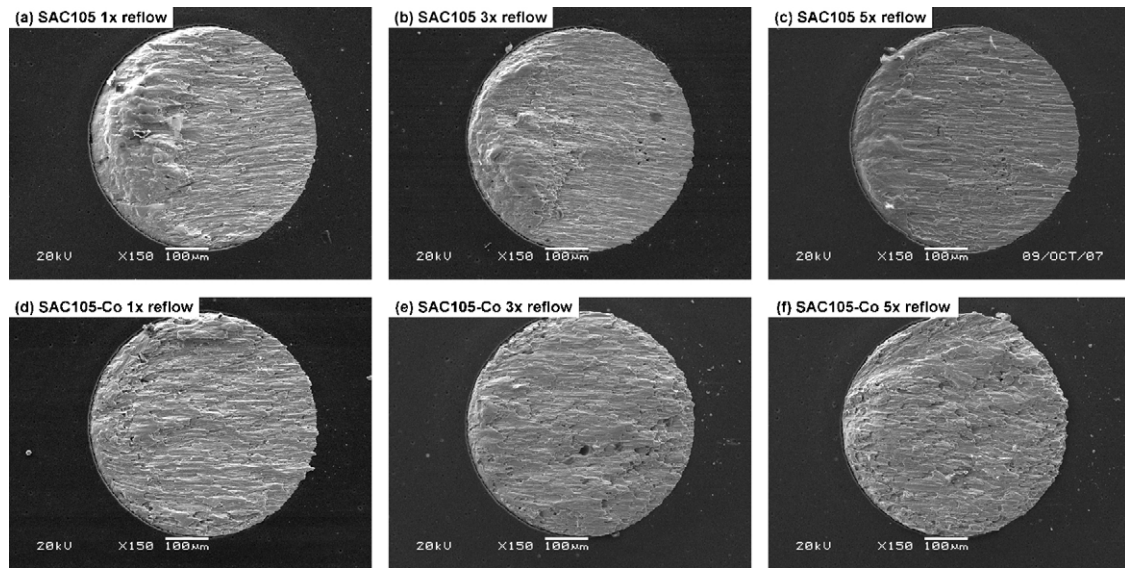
Fracture surfaces of SAC105(–Co) solder joints after various reflow cycles.
